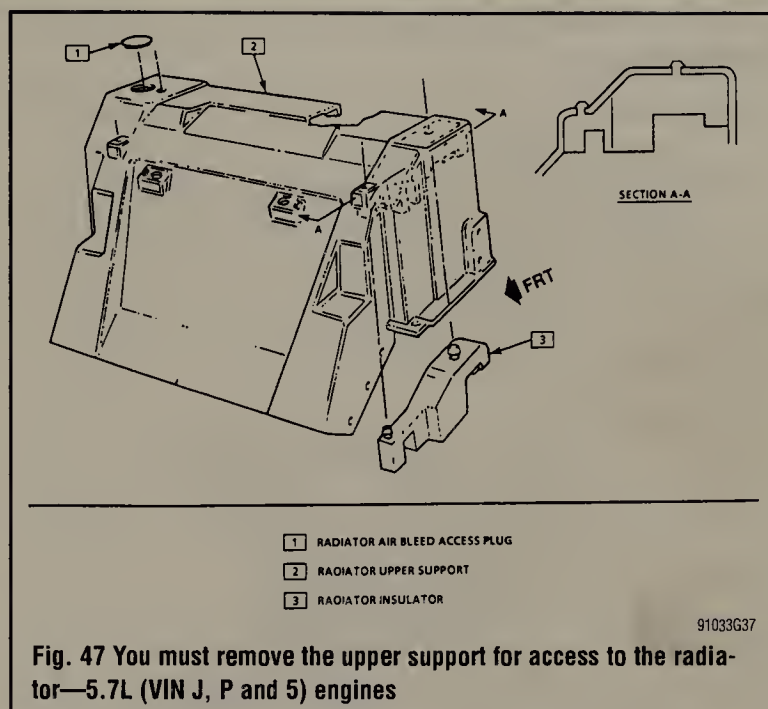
You must remove the upper support for access to the radiator—5.7L (VIN J, P and 5) engines
